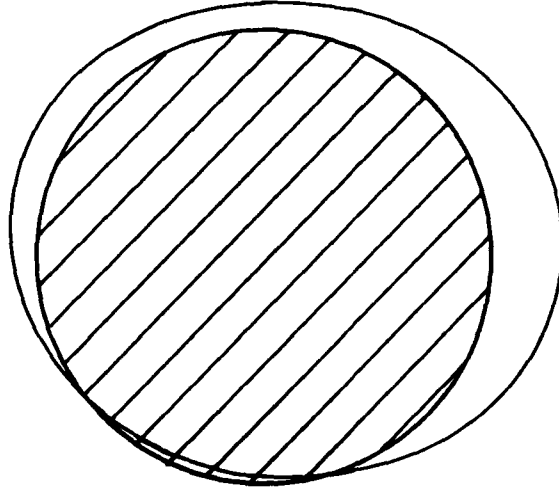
Initial and Post-Coldwork Hole Edge Boundaries for Fastener Holes #2 and #3 (Specimen #3).
